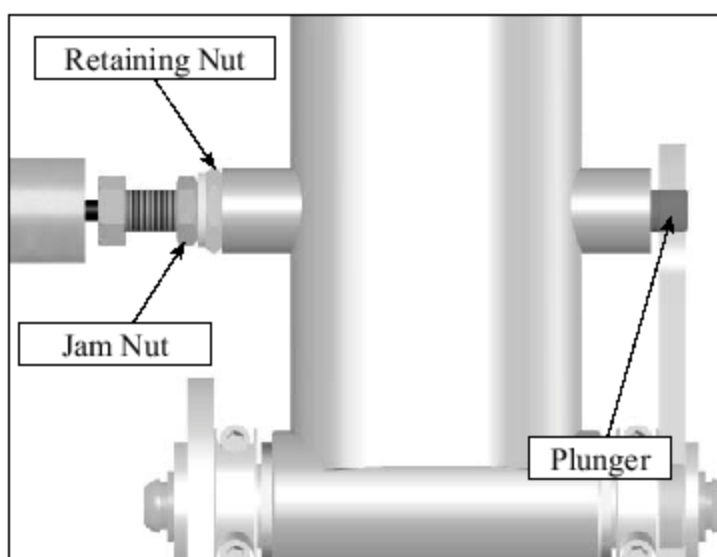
Before inserting the Cable Assembly into the Barrel Housing make sure the Jam Nut and the Retaining Nut are not touching.
